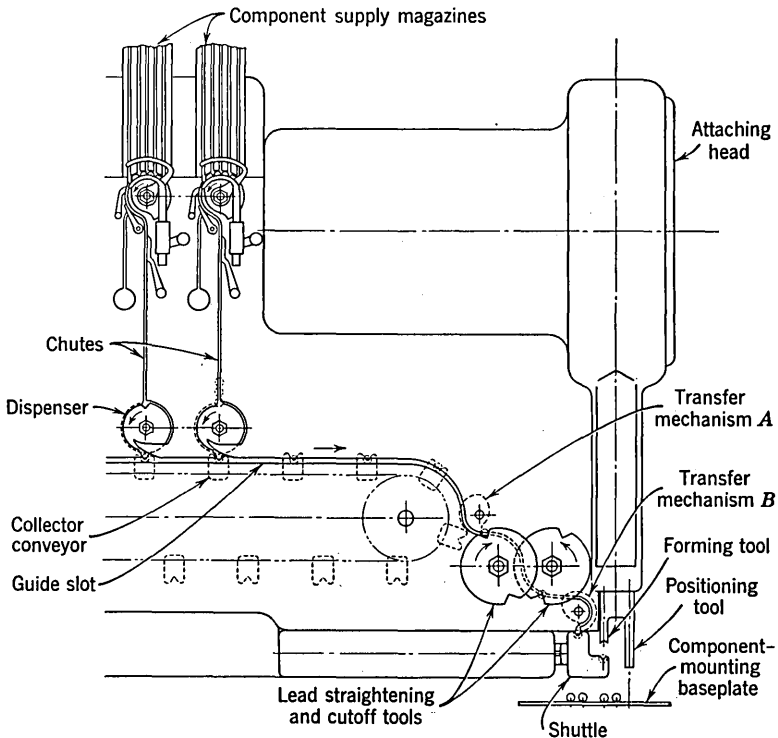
One design of a component-attaching head which will insert a sequence of components on the circuit board
